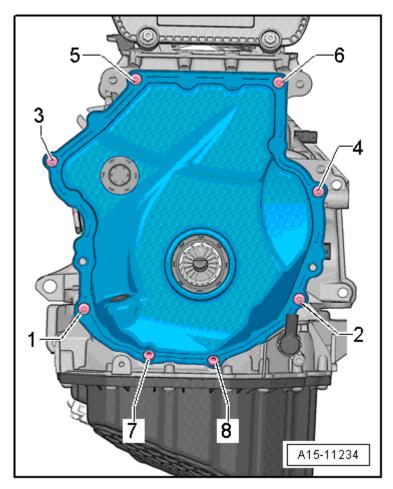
Identifying Timing Chain Guard Lower Section - Tightening Sequence for 8 Bolts
